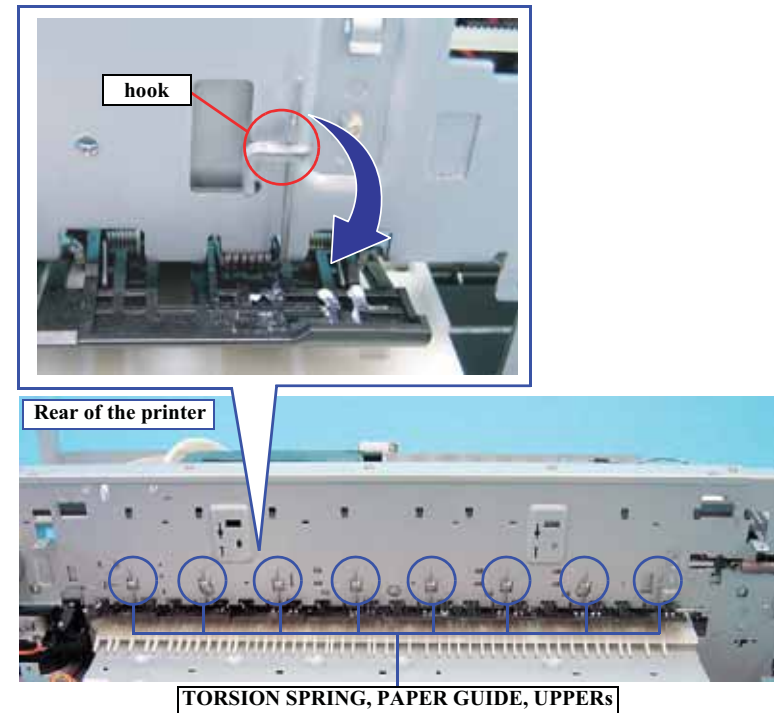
Removing the TORSION SPRING, PAPER GUIDE, UPPERS
